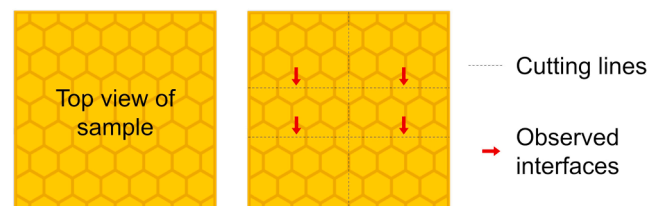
Schematic of the cutting pattern to extract four optical microscopy samples from a welded sandwich panel.
